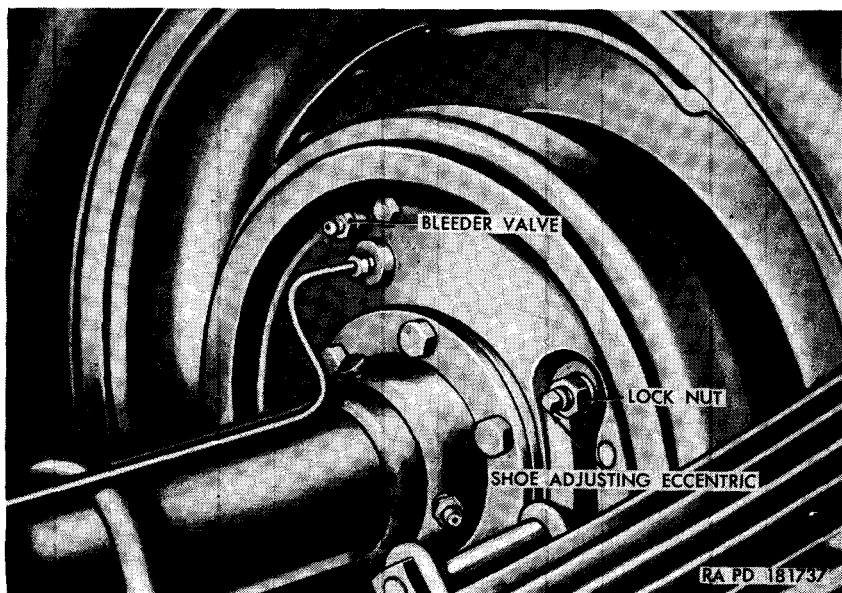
Brake shoe adjusting eccentric and bleeder valve.
